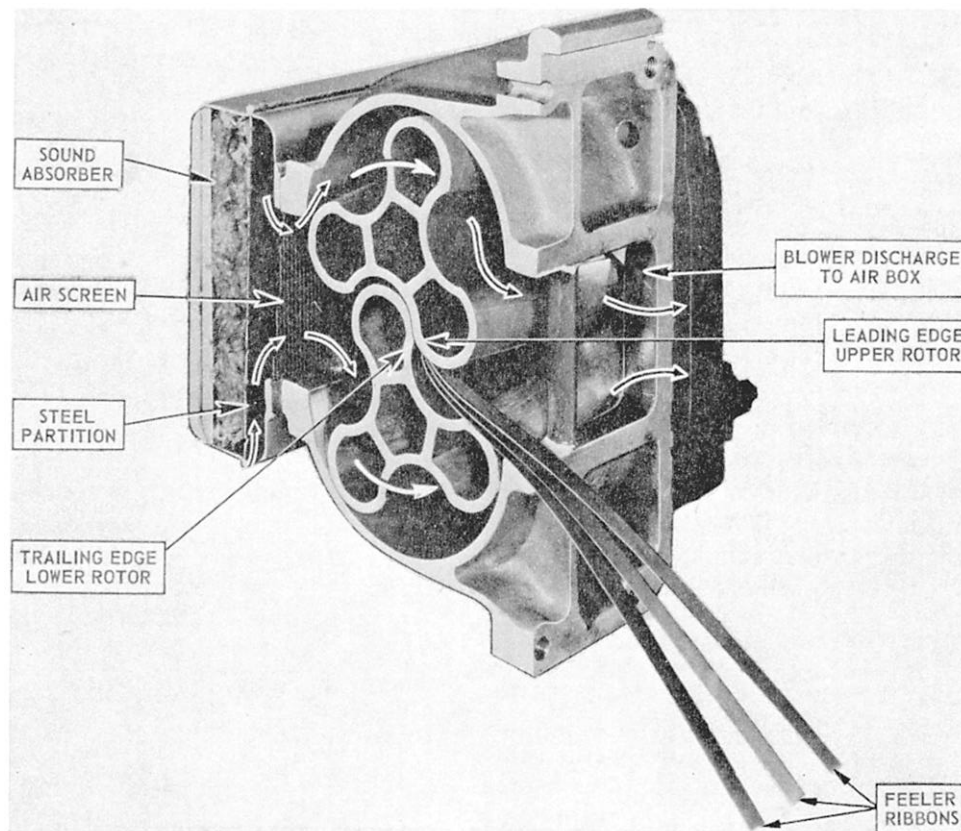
Checking clearance of positive displacement blower lobes.
